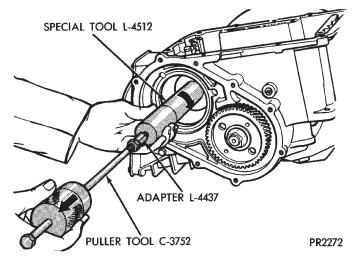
Remove Transfer Shaft and Bearing Retainer
